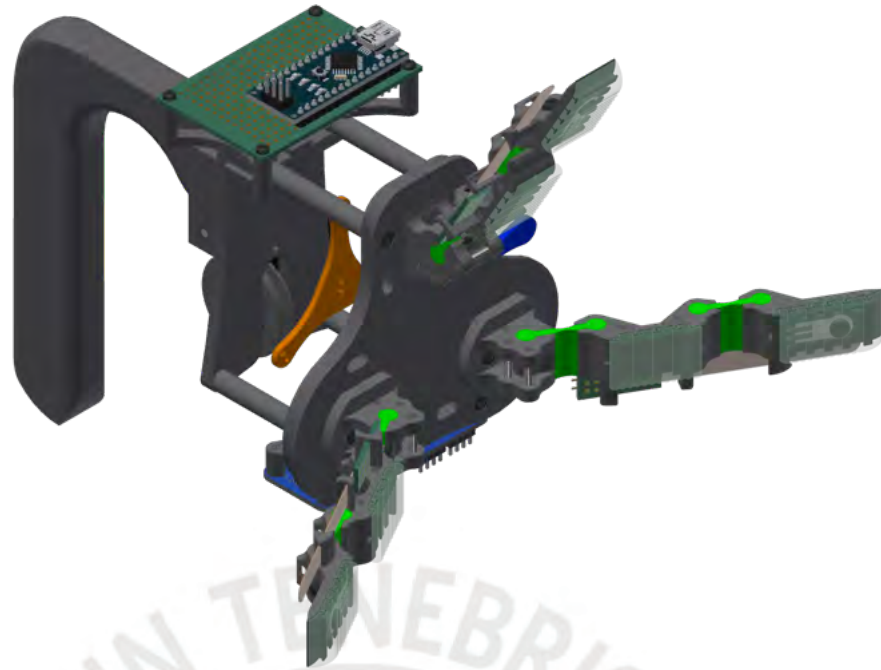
CAD-Model of the assembled Soft Robotic Gripper
